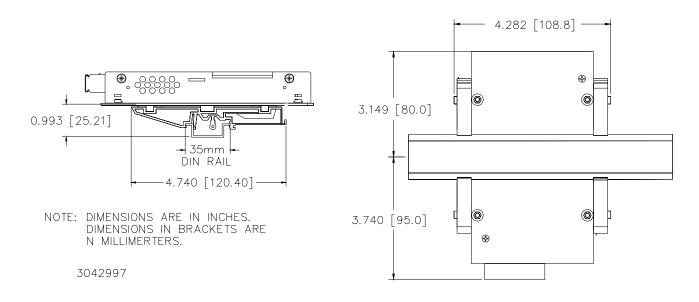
POWER SUPPLY WITH KIT INSTALLED, OUTLINE DIMENSIONS
